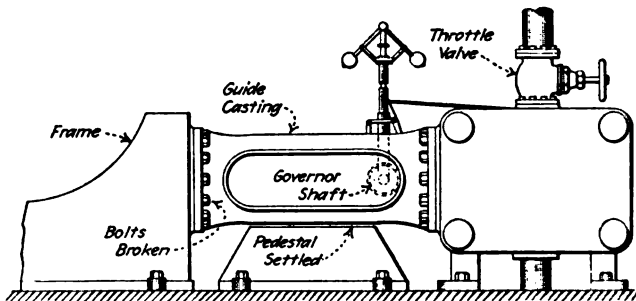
Showing settling pedestal which caused the engine to settle out of line and knock.
